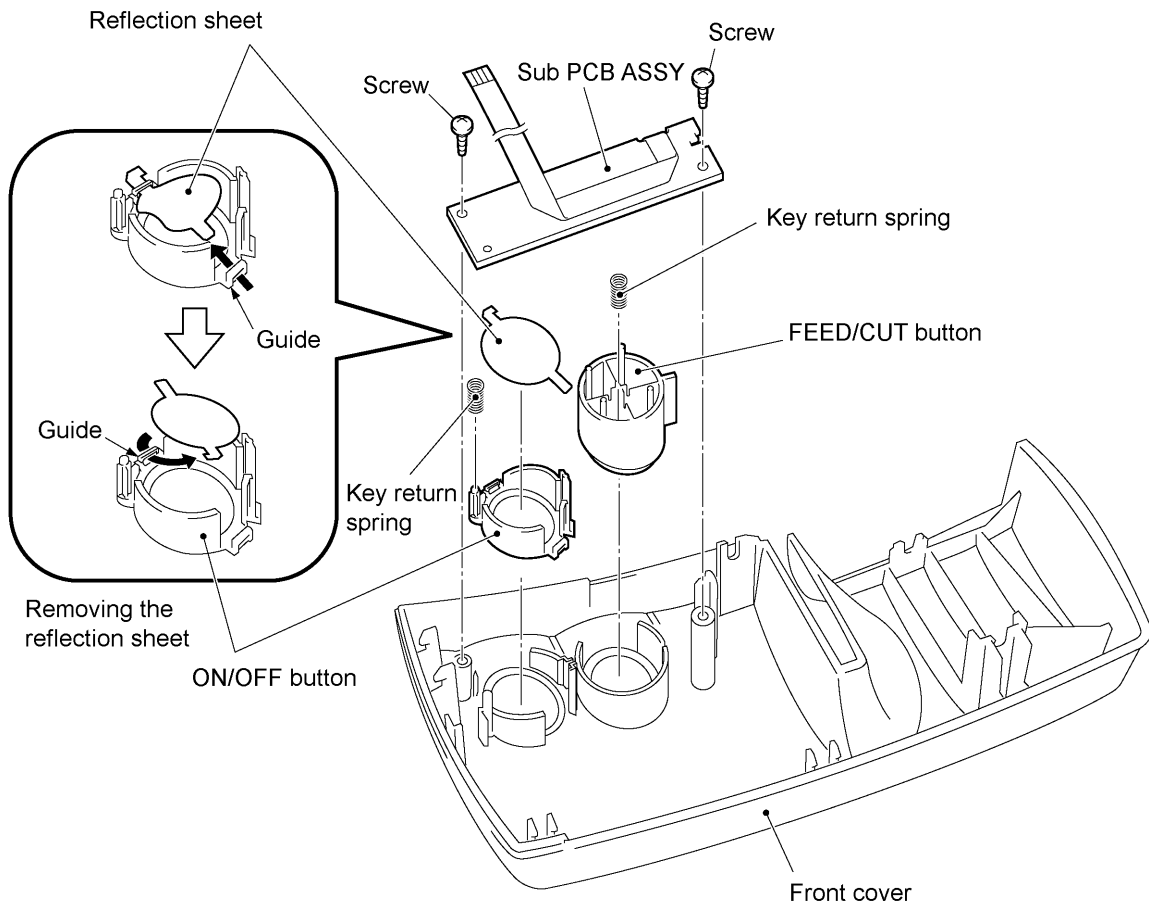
Removing the Sub PCB ASSY, FEED/CUT Button, and ON/OFF Button
